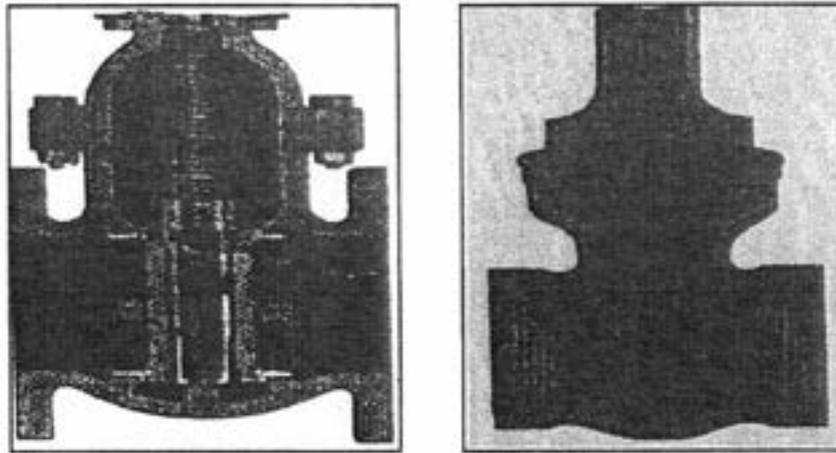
Parallel Double Disk & Split Wedge Gate Valve
